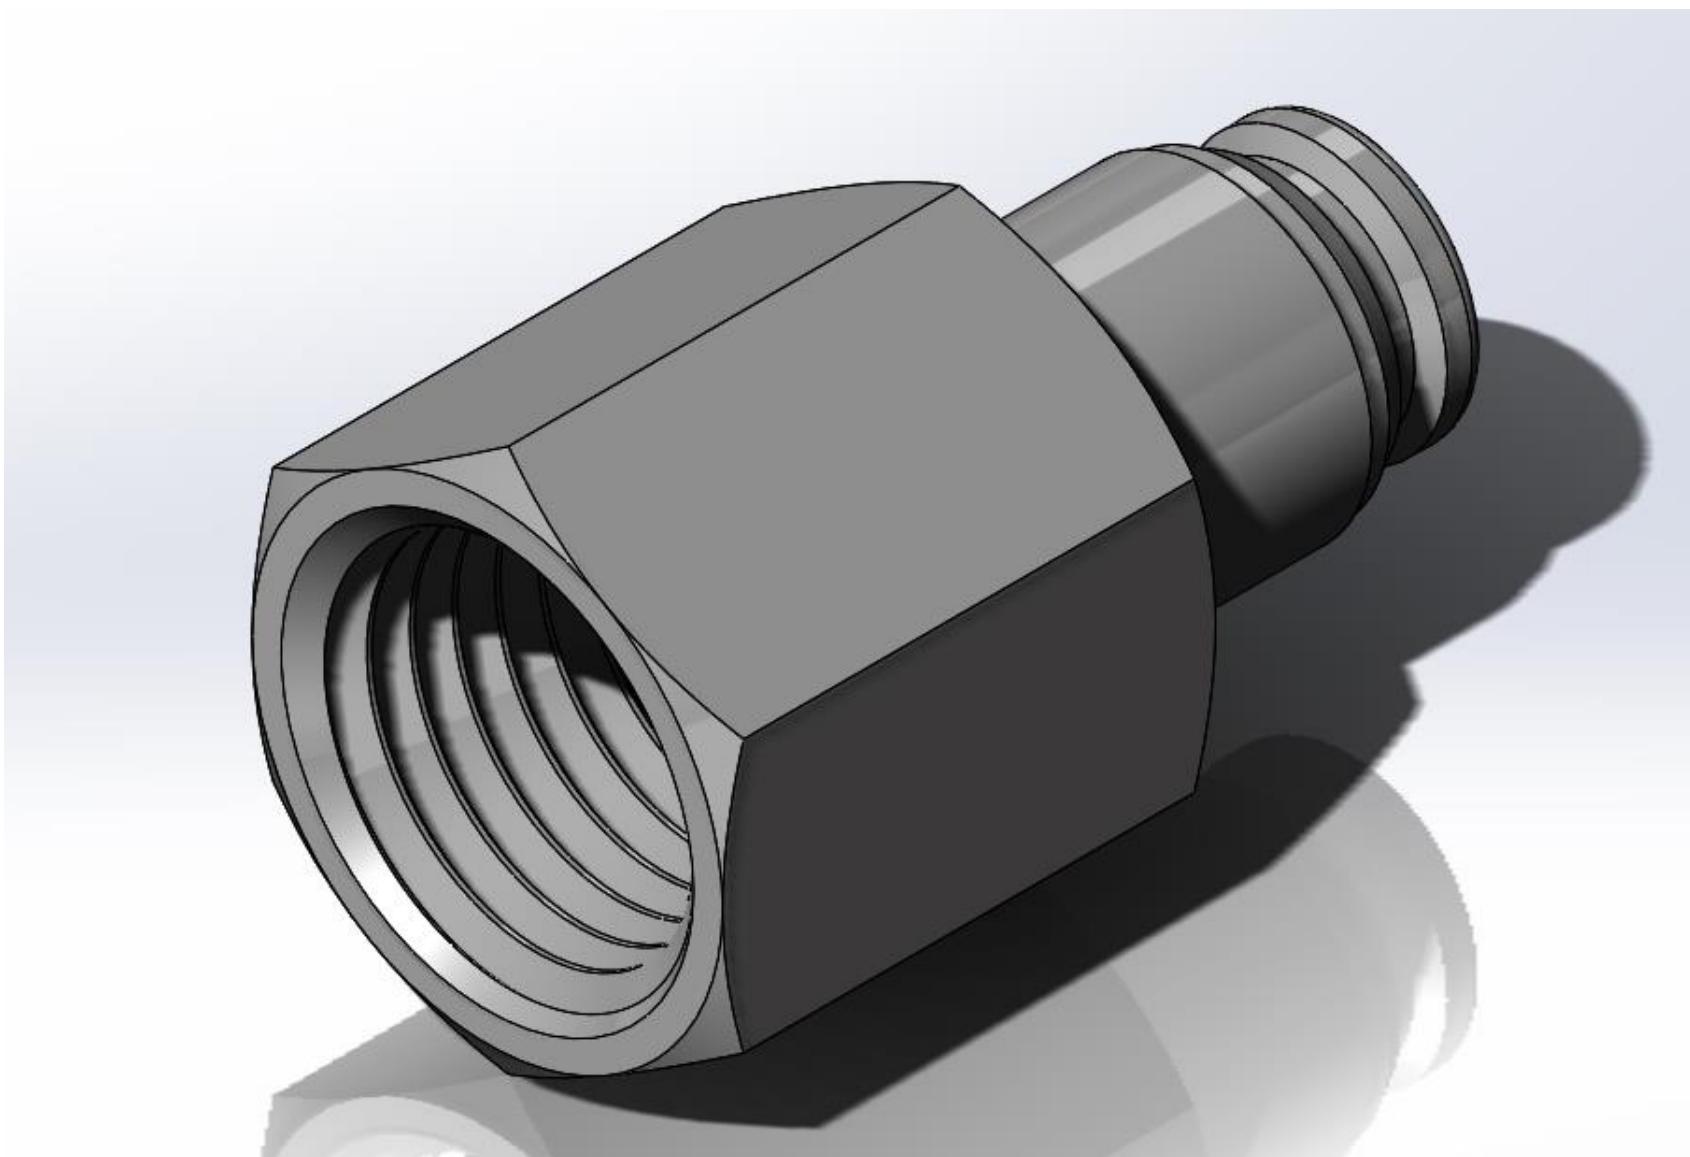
Part 1021 (Push-to-Connect Tube Fitting for Air) CAD Drawing
